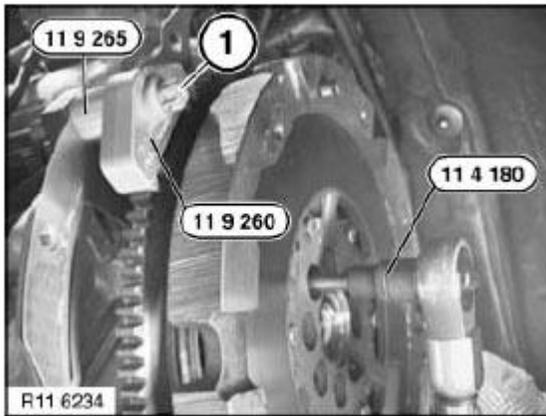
Identifying Existing Transmission Bolt With Special Tools (11 9 255, 11 9 260 And 11 4 180)
